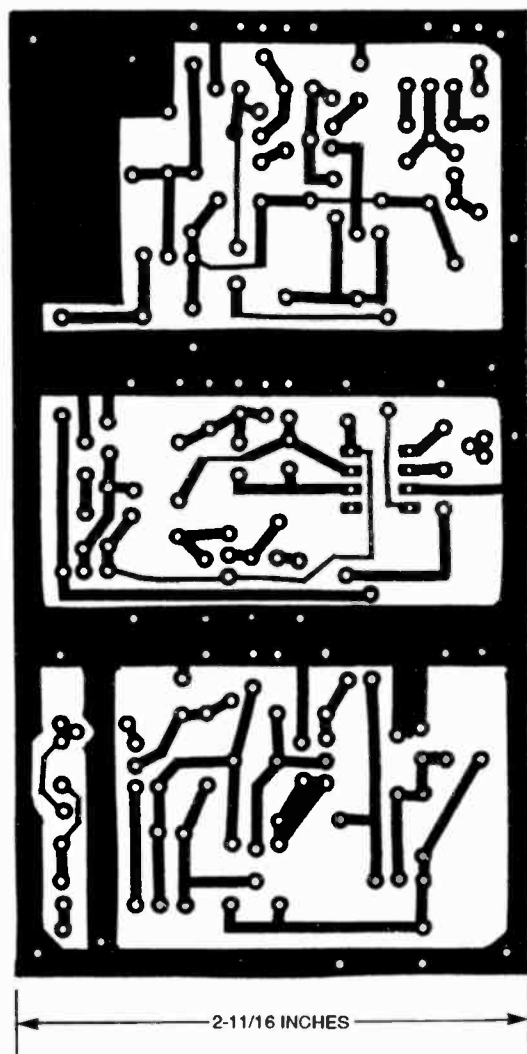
Building the Converter on a PC board is strongly recommended. You can use this full-size pattern to make your own board.
